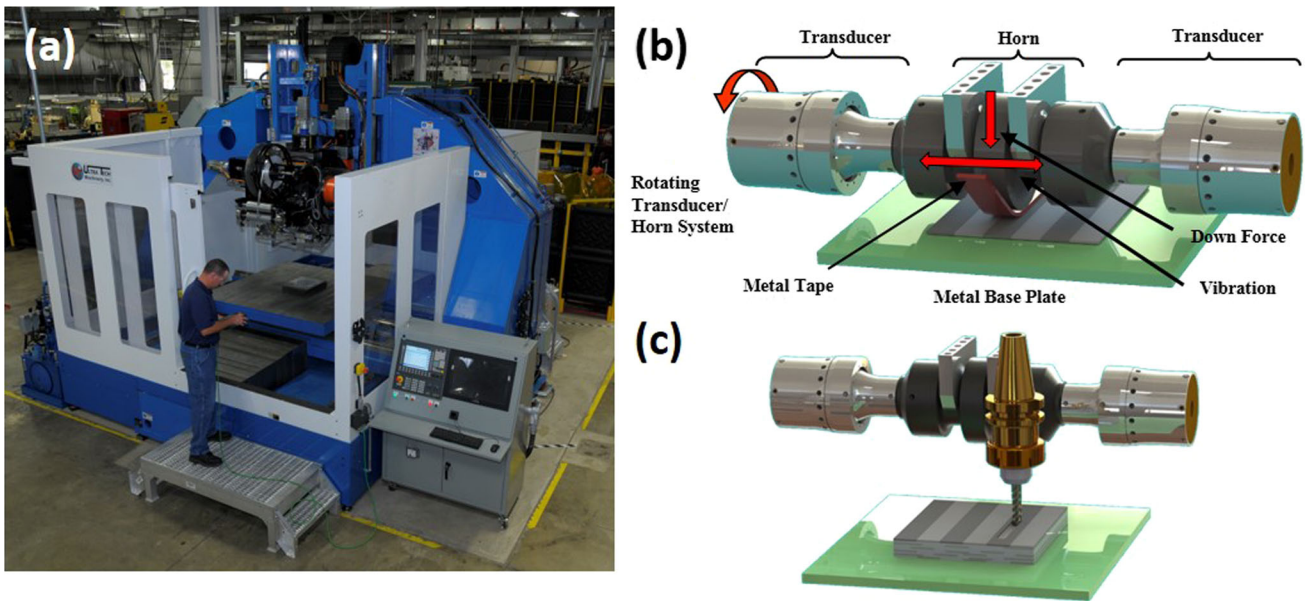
UAM process: (a) Fabrisonic SonicLayer™ 7200; (b) additive or ultrasonic welding stage of process; (c) subtractive or machining stage of process. The build envelope of the Fabrisonic SonicLayer™ 7200 is $1.8 \times 1.8 \times 1$ m. Reprinted with permission
